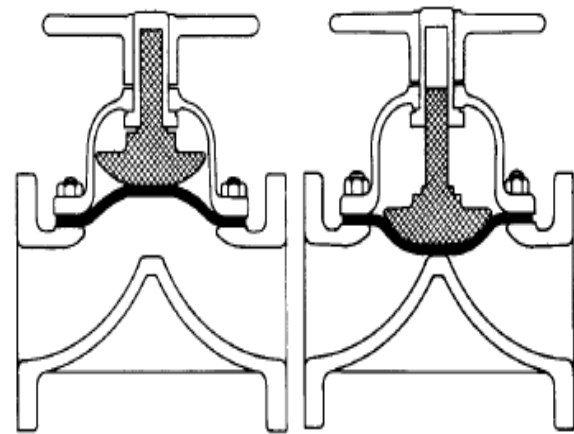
Sketch of a weir-type of diaphragm valve in open and closed positions.
